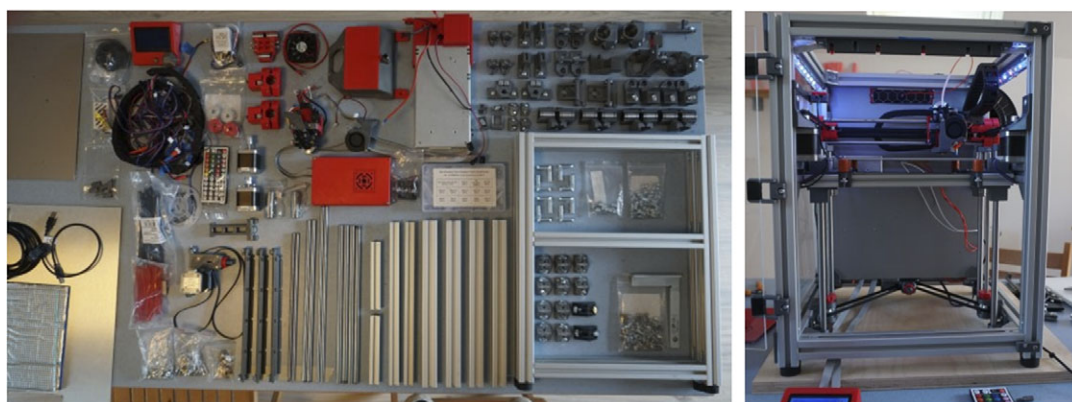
Left – All parts of the printer (prepared for assembly). Right – Fully assembled printer.
